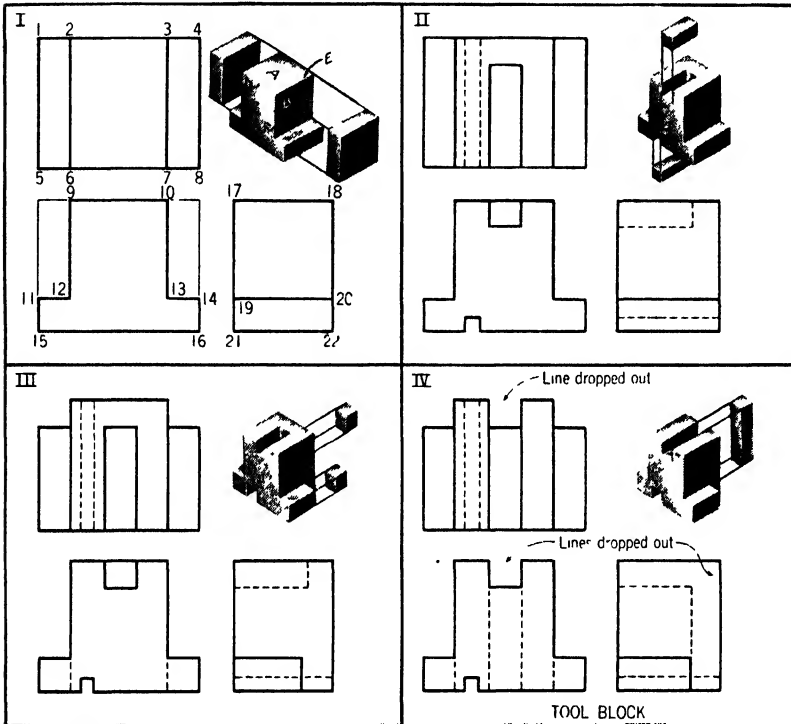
MACHINING A "TOOL BLOCK" — NORMAL SURFACES AND EDGES
